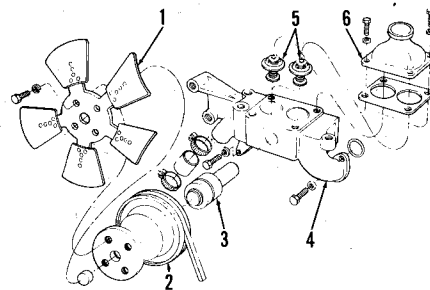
A—Exploded view of thermostat housing and fan drive assembly on Models TW-10, TW-20 and TW-30.
